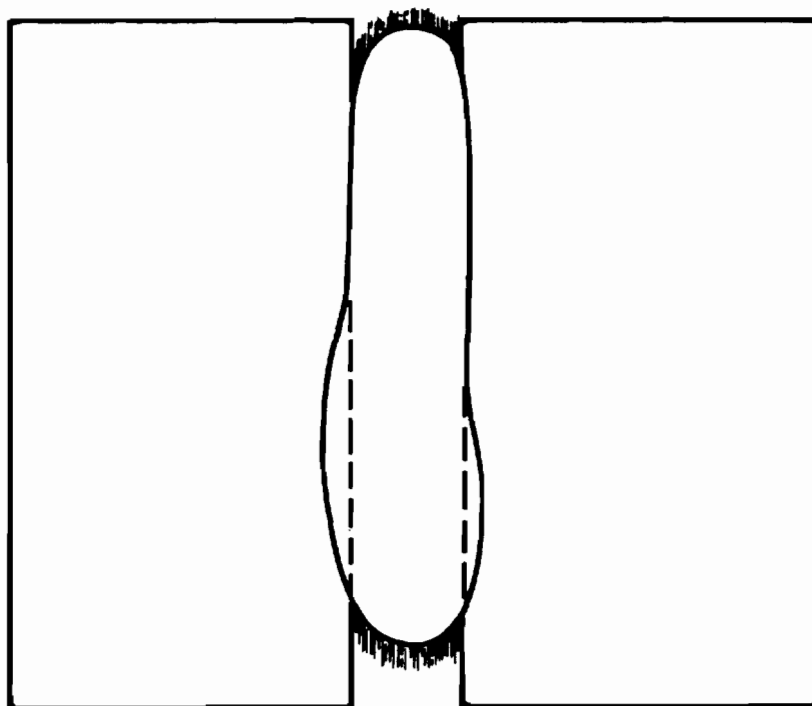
FUSION PATTERN AT THE RAIL BASE FROM ELECTROSLAG WELD #3.
